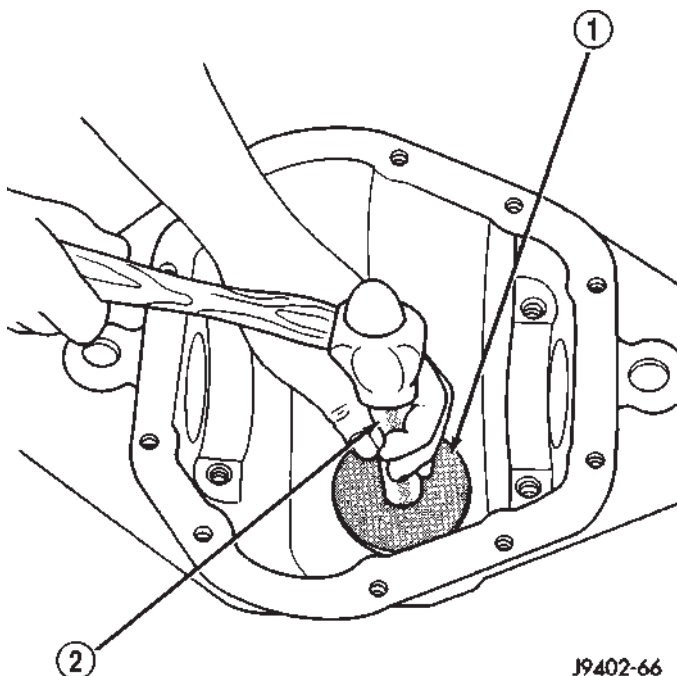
Rear Bearing Cup Removal1 - REMOVER
